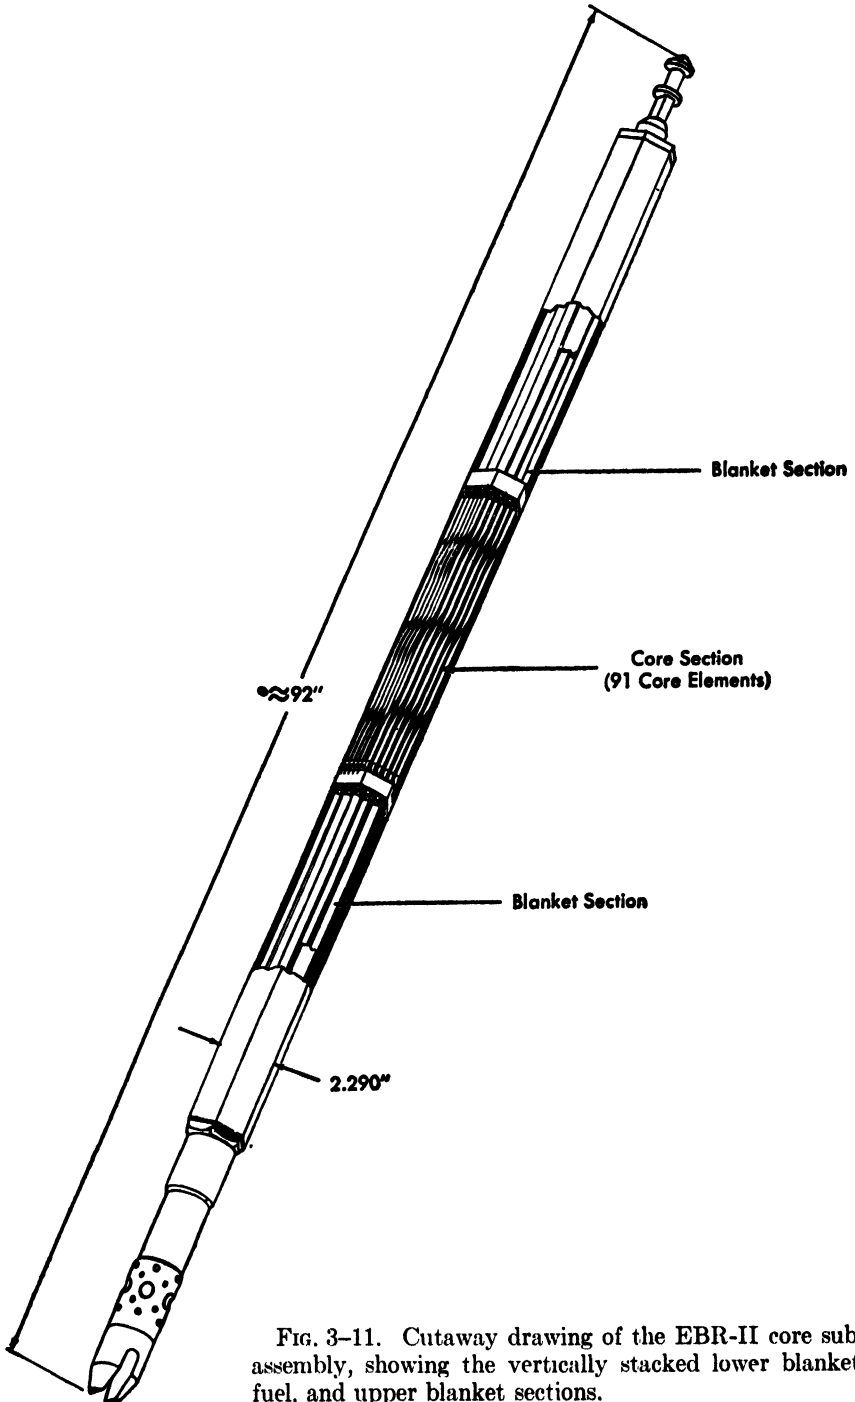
Cutaway drawing of the EBR-II core sub-assembly, showing the vertically stacked lower blanket, fuel, and upper blanket sections.
